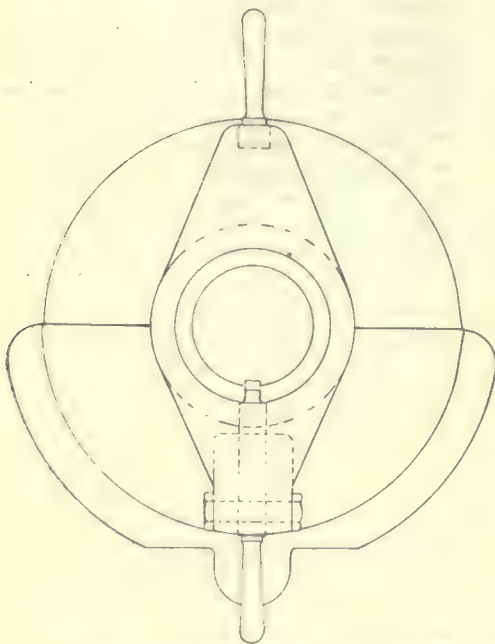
DETAILS OF THREAD LEAD DEVICE ON THREAD MILLERS.
